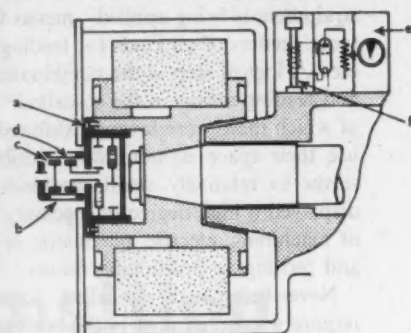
Balancing device (Hartex): a Mechanical balancing unit b Operating control. c, d Setting rings. e Electronic measuring and indicating unit. f Mechanical vibrator.
